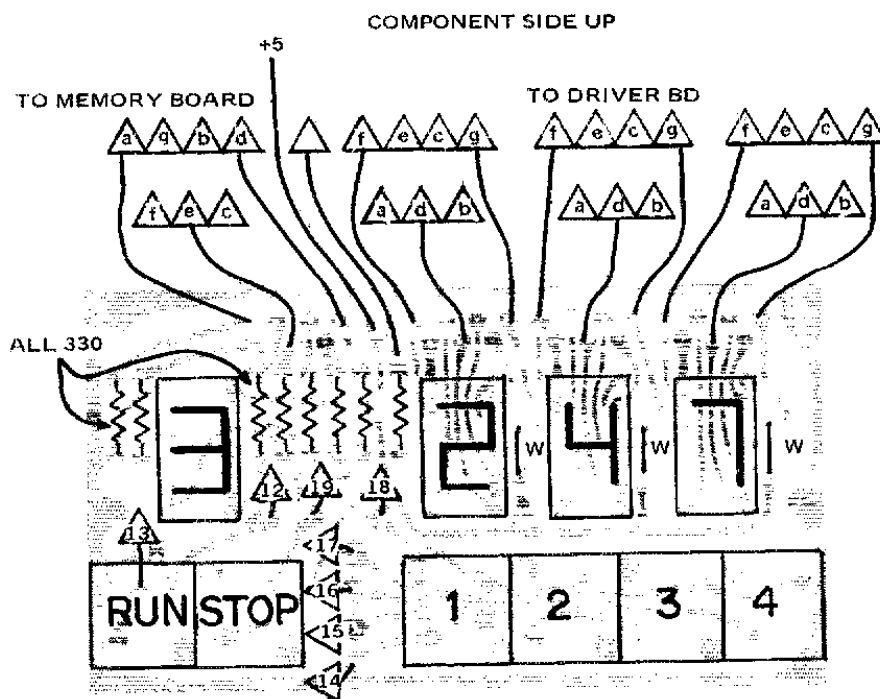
Etching pattern and component layout for readout board, shown from component side. W = wire jumpers. See Table I for wiring connections to other parts of the circuit.
